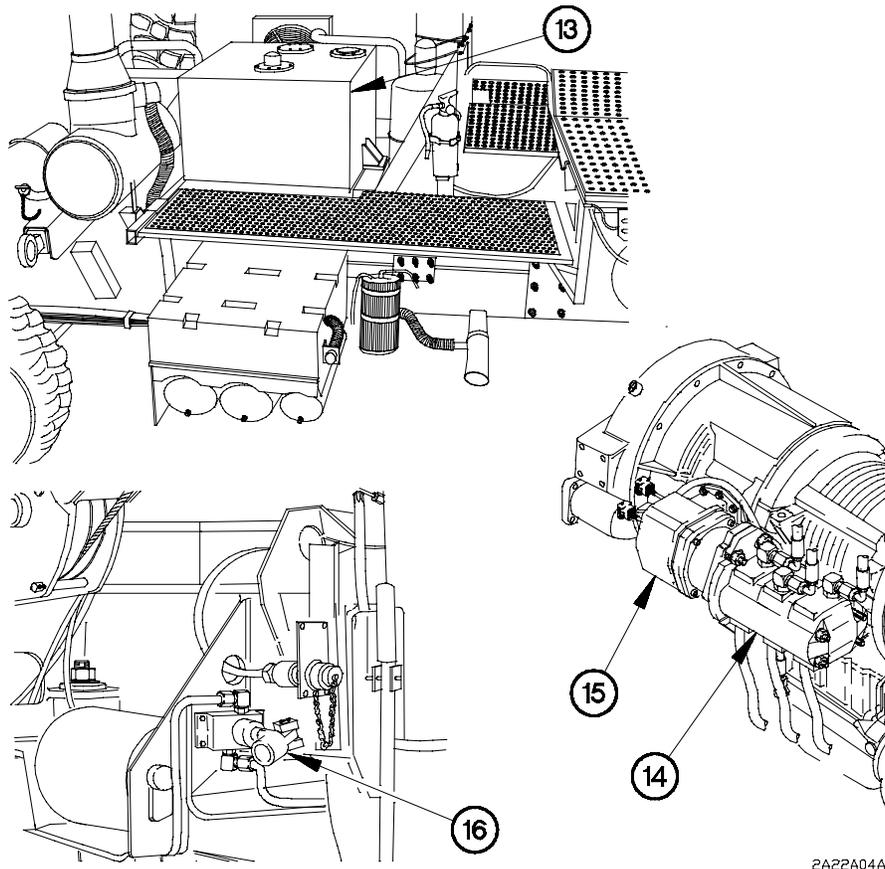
Material Handling Crane (MHC), 30K Winches, and Underlift Assembly (Cont)
